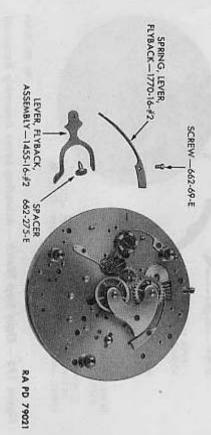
Elgin Stop Watch — Fly-back Lever Assembly Removed
